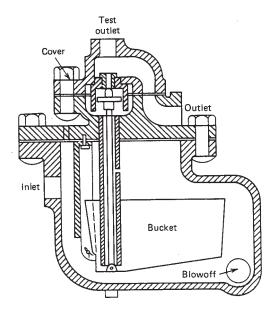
Open bucket steam trap. (Courtesy of Armstrong Machine Works.)
